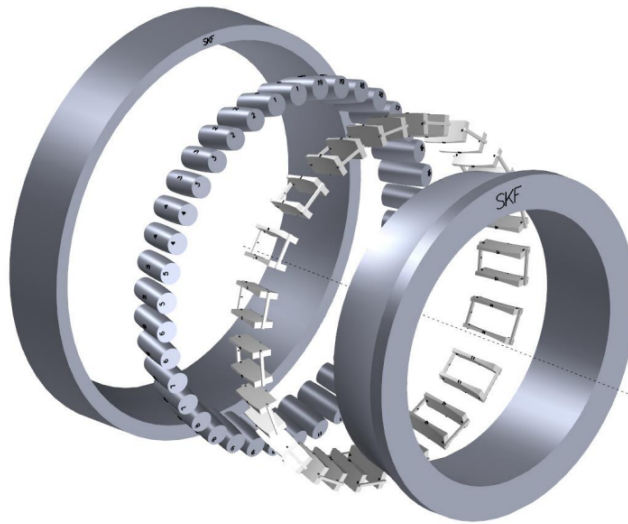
Exploded view of the SAT bearing with *every other pocket* segments assembled
